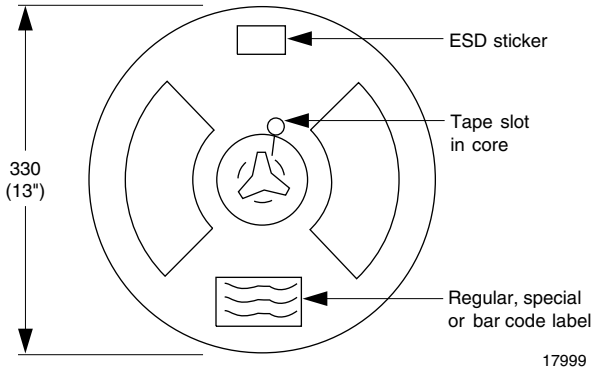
Tape and Reel Shipping Medium (EIA-481, revision A, and IEC 60286), 2000 units per reel
